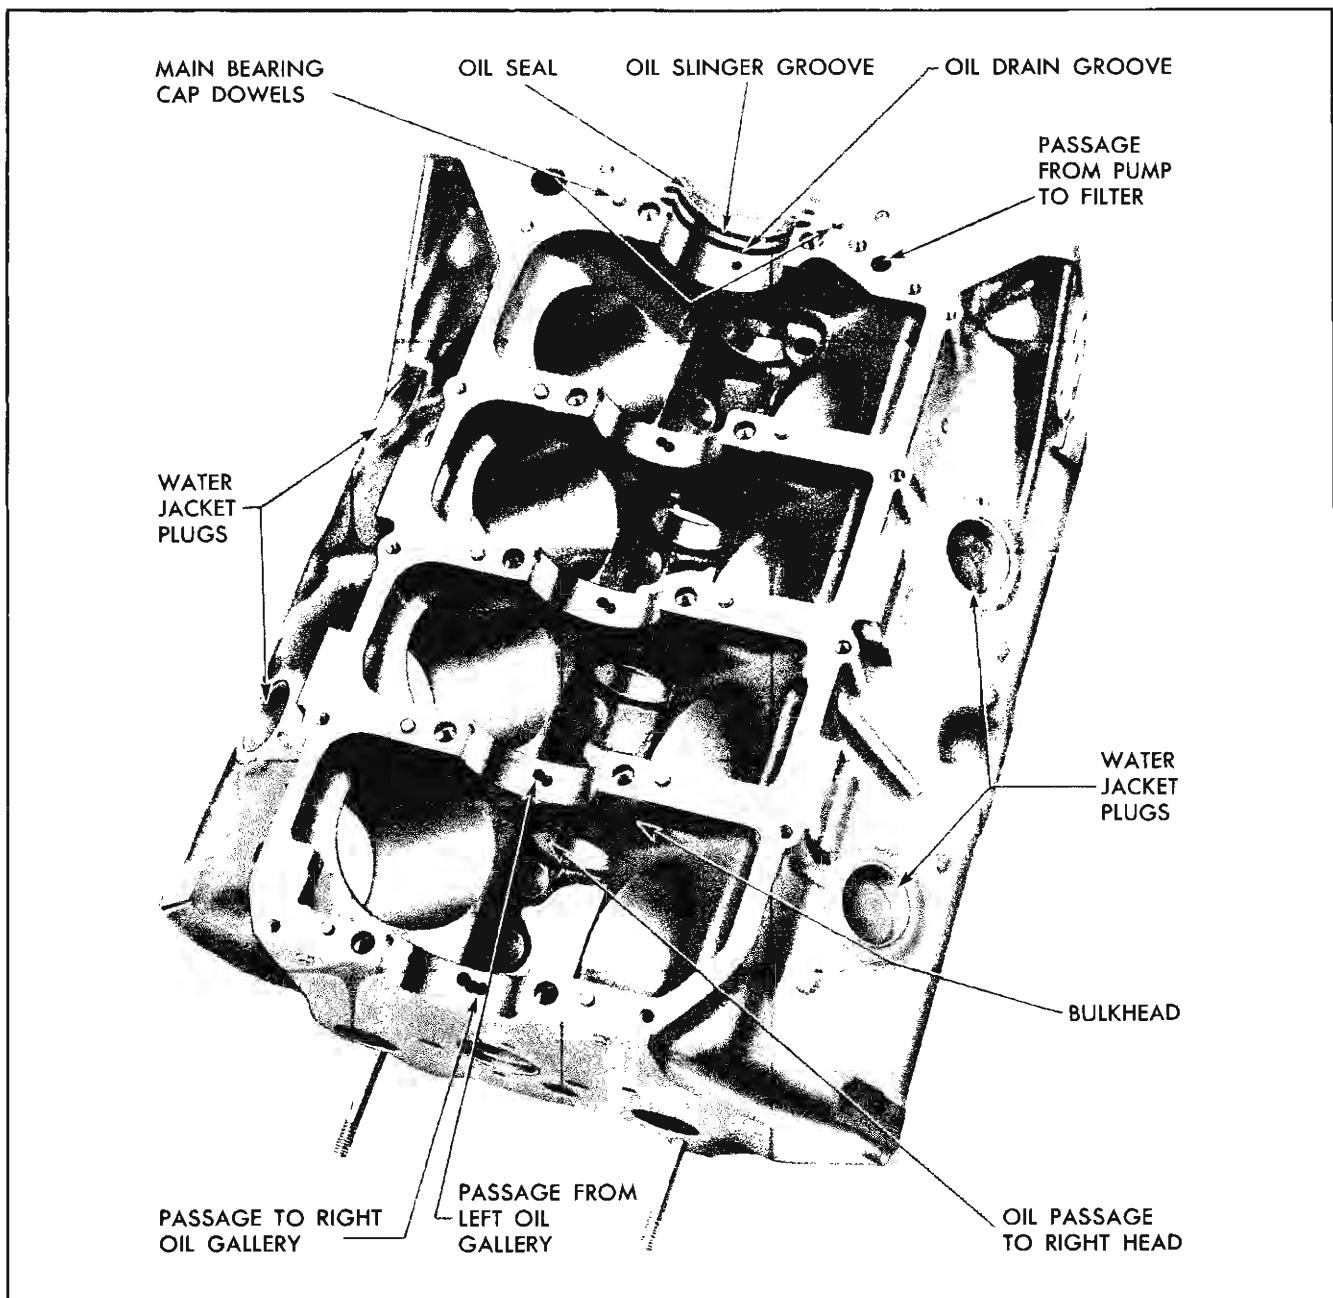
Cylinder Block—View from Bottom—V-8 Engine
